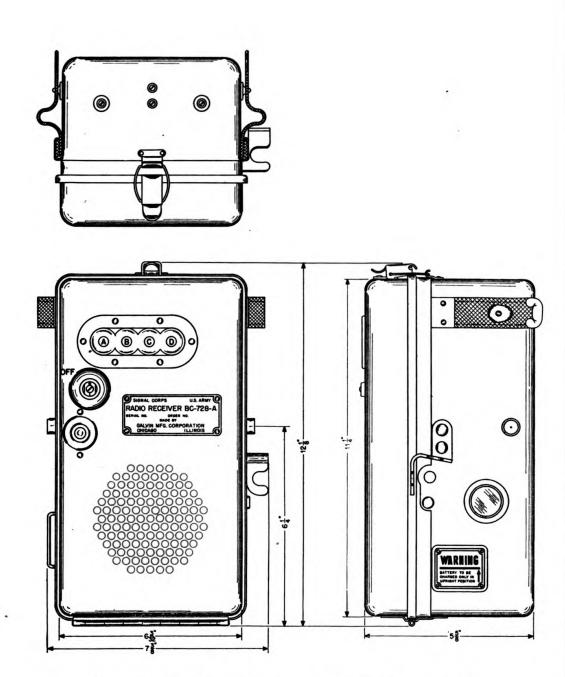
Radio Receiver BC-728-A, Outline Dimensional Detail
